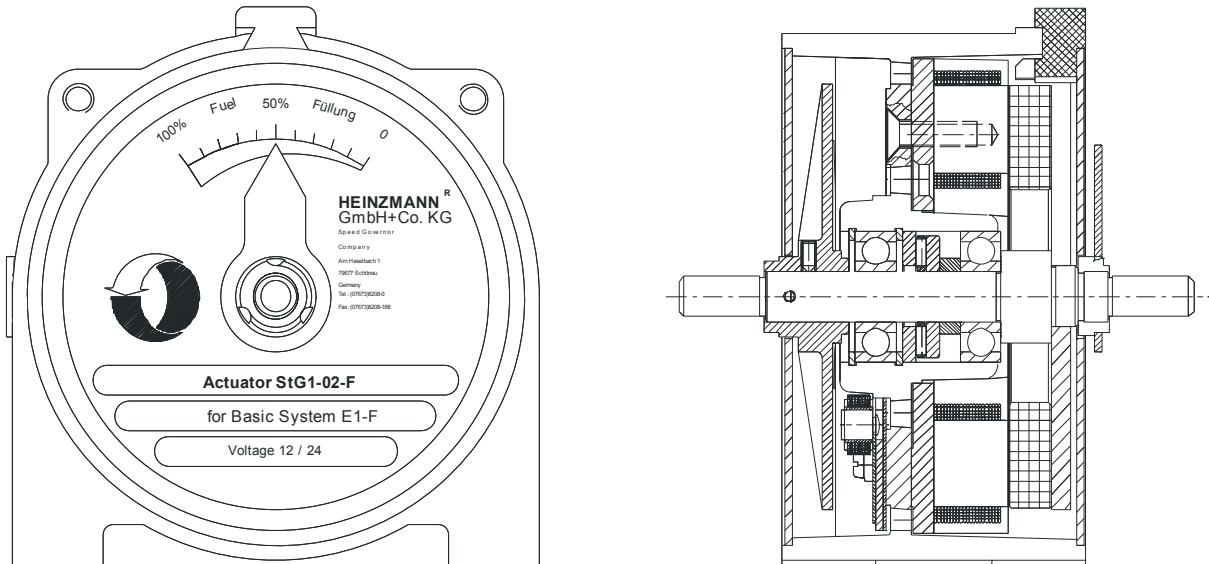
Sectional Drawing of Actuator StG 1-02-F
